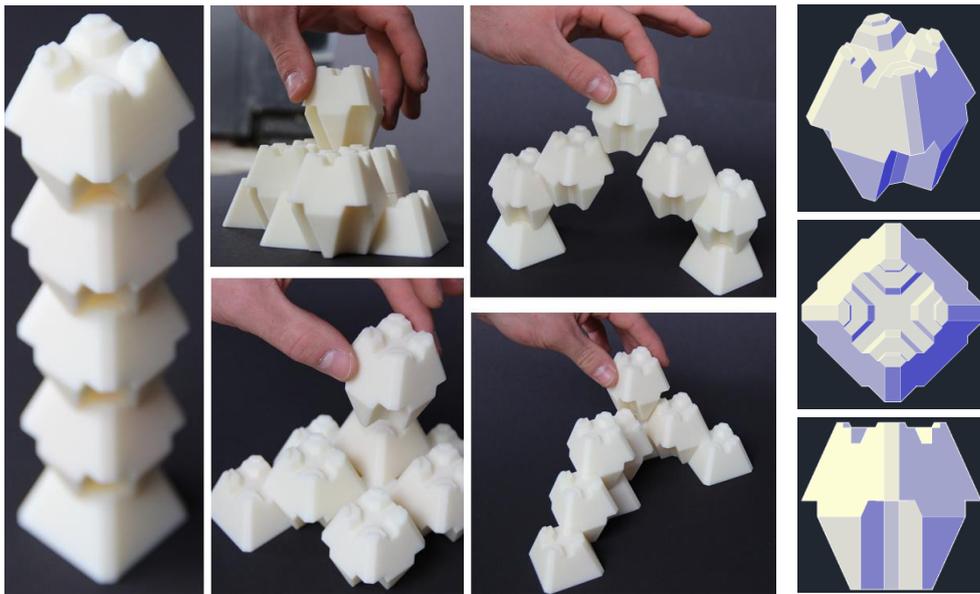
The 3D printed droxels, allowing for very geometrically diverse assemblies
